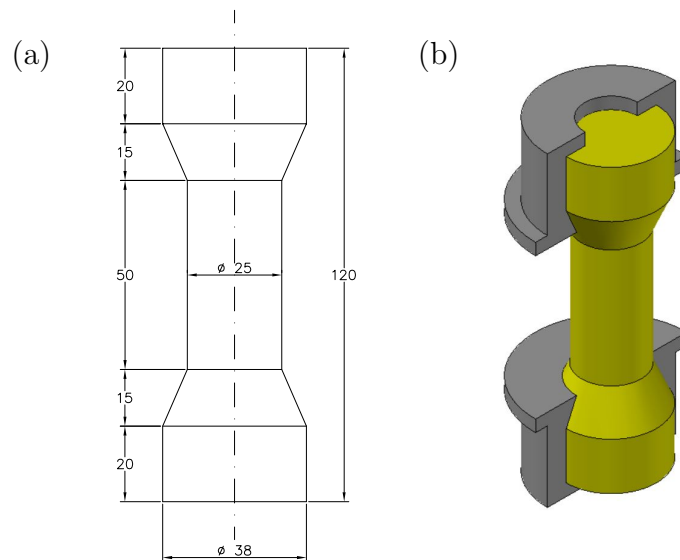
Specimen geometry (a) and cutaway of the bushings mounted on the specimen in all tests (b), according to Concas et al. [23].
